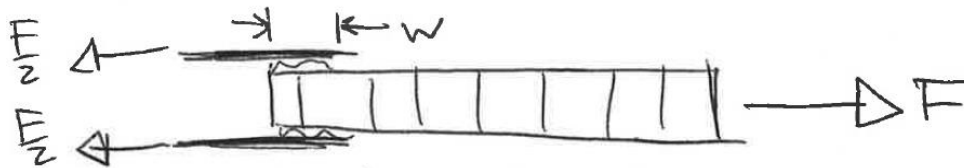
Lap joint loading model, showing the two sets of lap joint plies and a single part.
